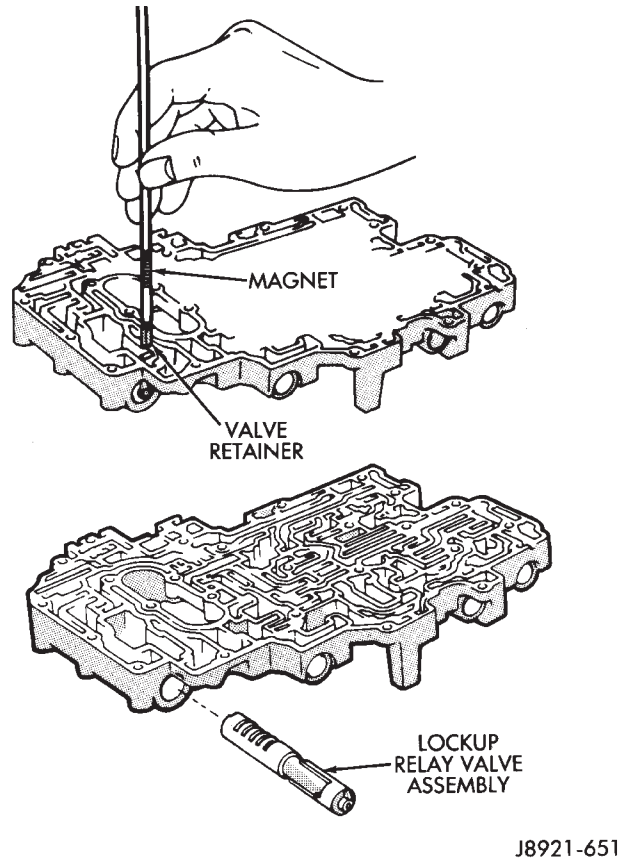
Removing/Installing Converter Clutch Relay Valve
